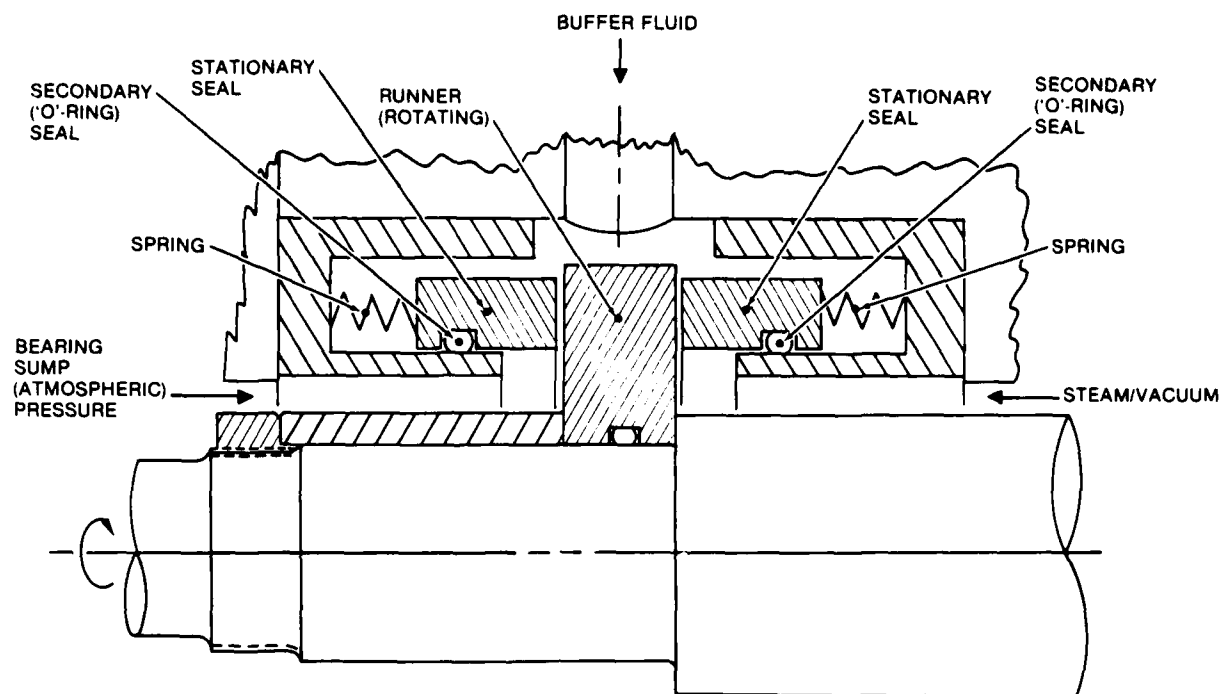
Example Face Seal Arrangement for Buffer Seal System
